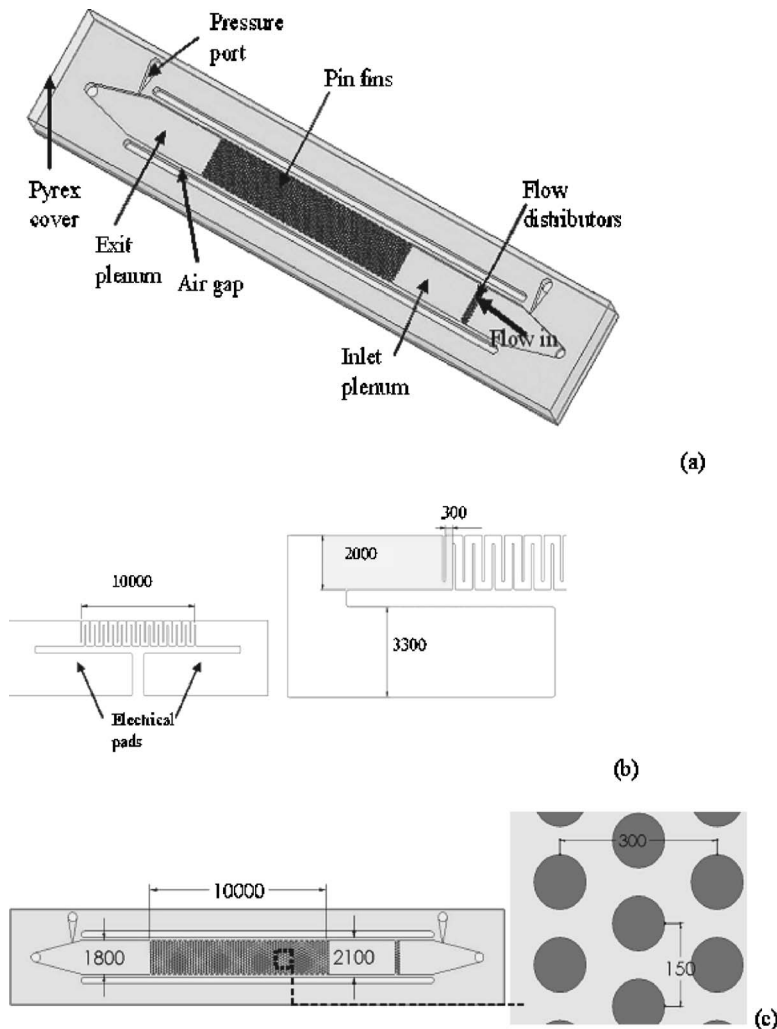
(a) CAD model of the micro pin fin heat sink. (b) Heater dimensions (dimensions in mm). (c) Top view of the device (dimensions in μm).
